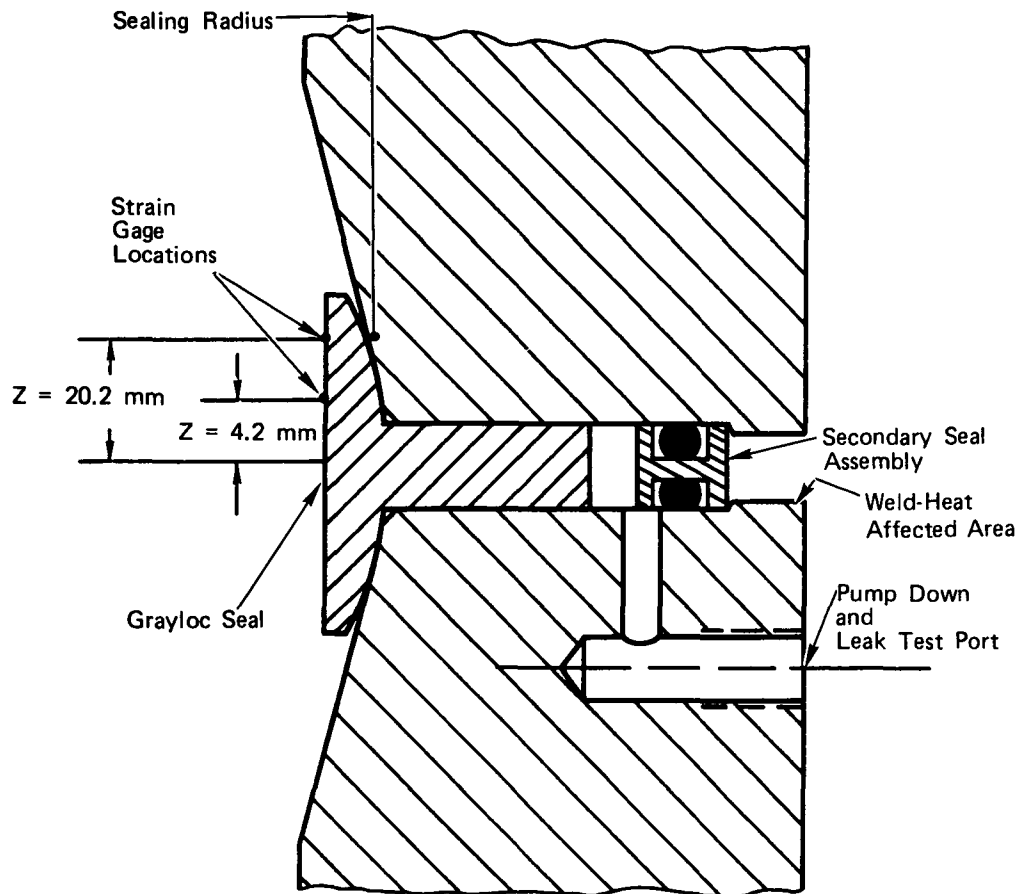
Cross Section Showing Seal, Secondary Seal Assembly, and Strain Gage Locations (no scale)
